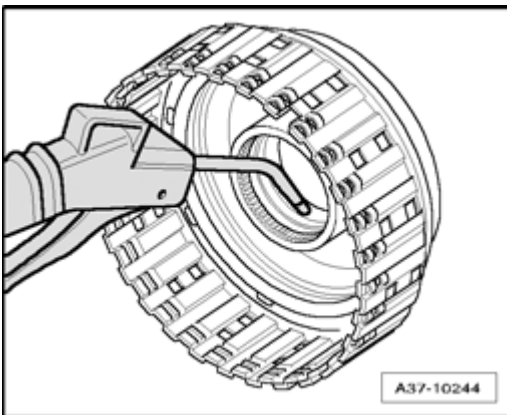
Pressing Piston "B" Out Of Cylinder "B" With Compressed Air
